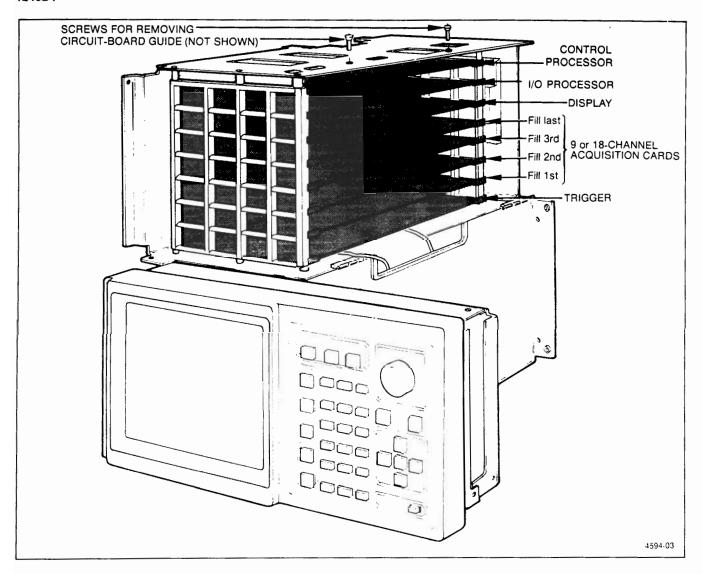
View of the 1240 with the card cage in the service position. The circuit boards in the card cage are held in place by a circuit board guide (not shown in this figure). This guide must be removed before you can install a new acquisition card. To remove the guide, remove the two screws shown above. Install 1240D1 (9-channel) acquisition cards first, starting with the slot next to the Trigger Board. Fill any remaining slots with 1240D2 (18-channel) cards. Any empty slots should be next to the Display Board.
